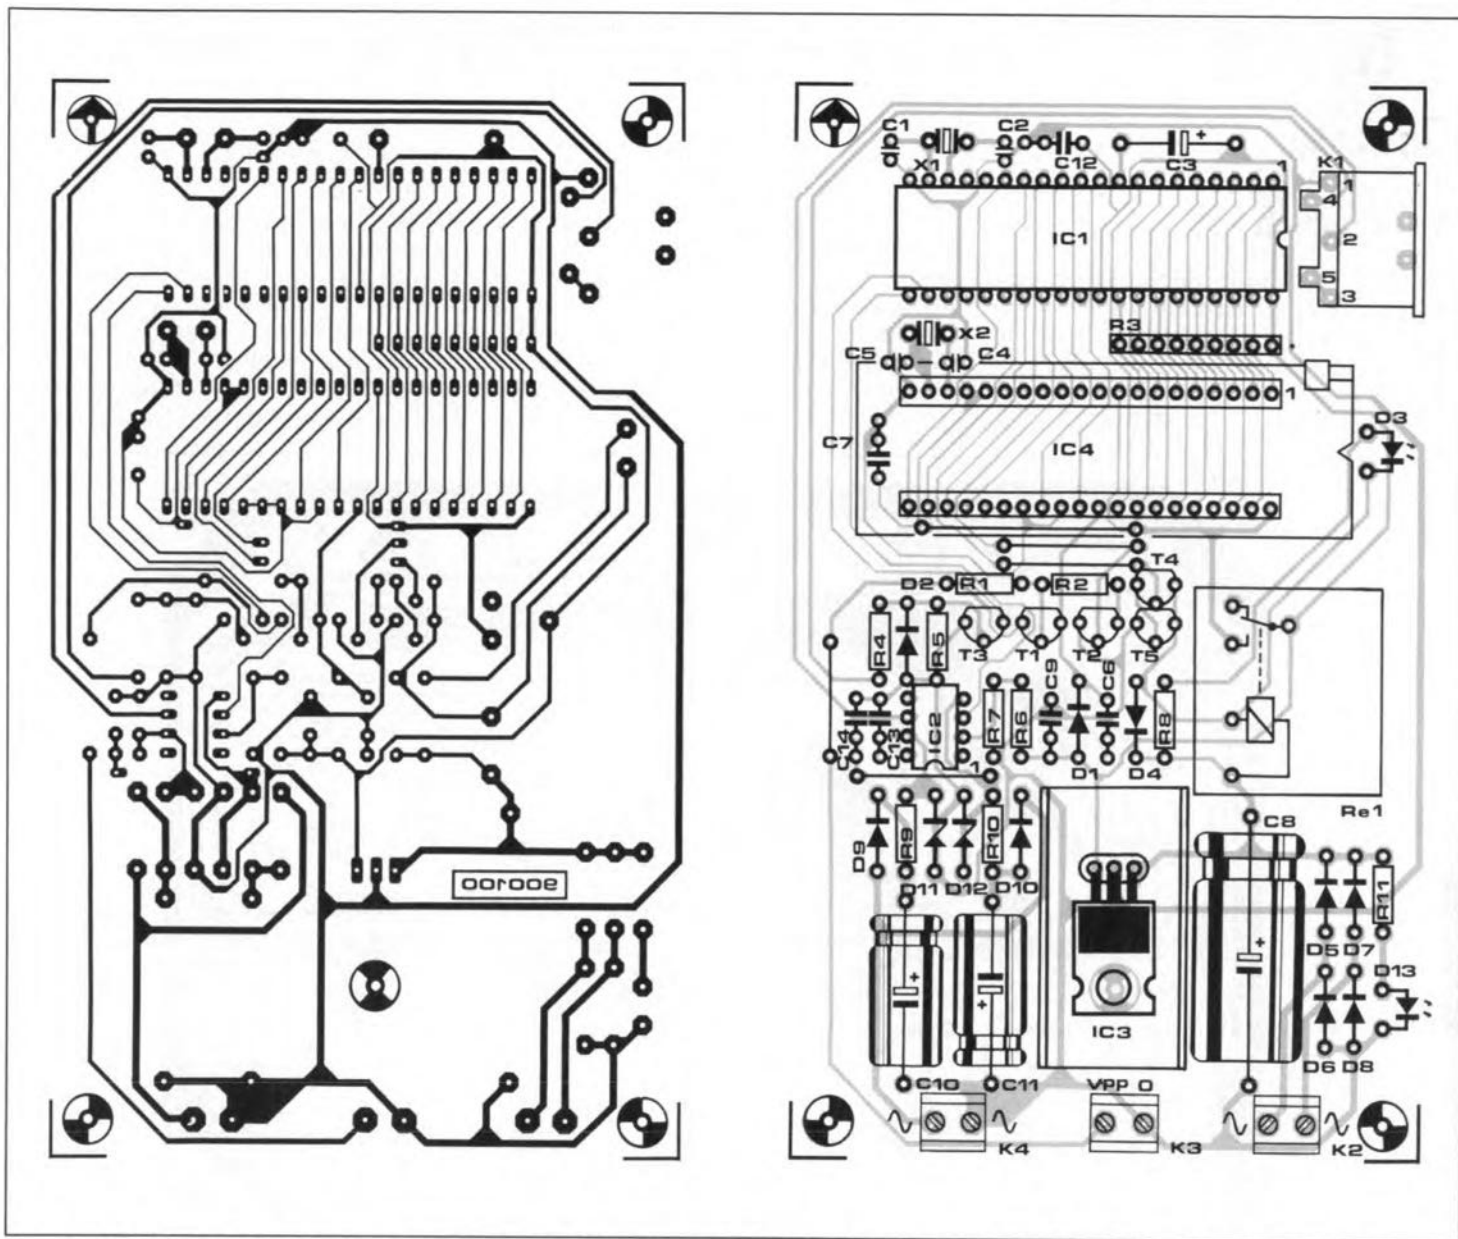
Track layout and component mounting plan of the single-sided printed-circuit board. Fit a 40-way ZIF socket in position IC4.
